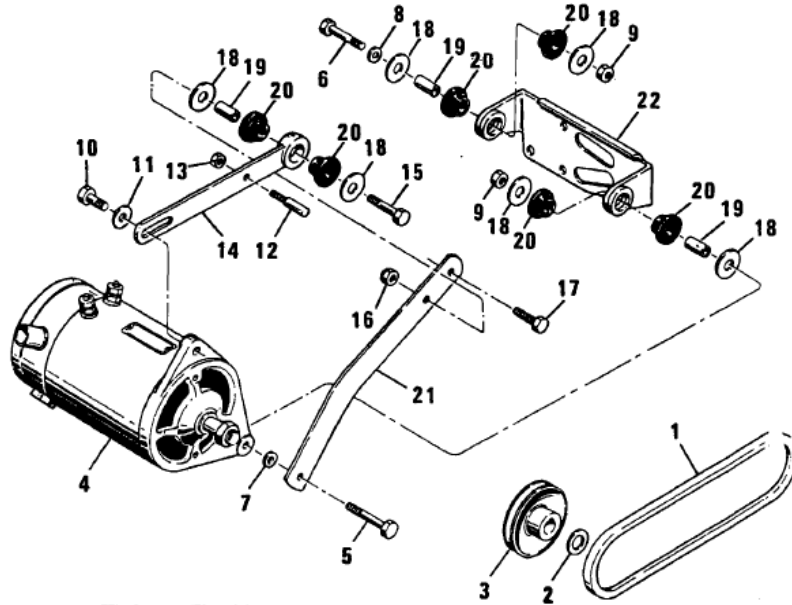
GENERATOR AND MOUNTING BRACKETS MODEL 0-470-M
